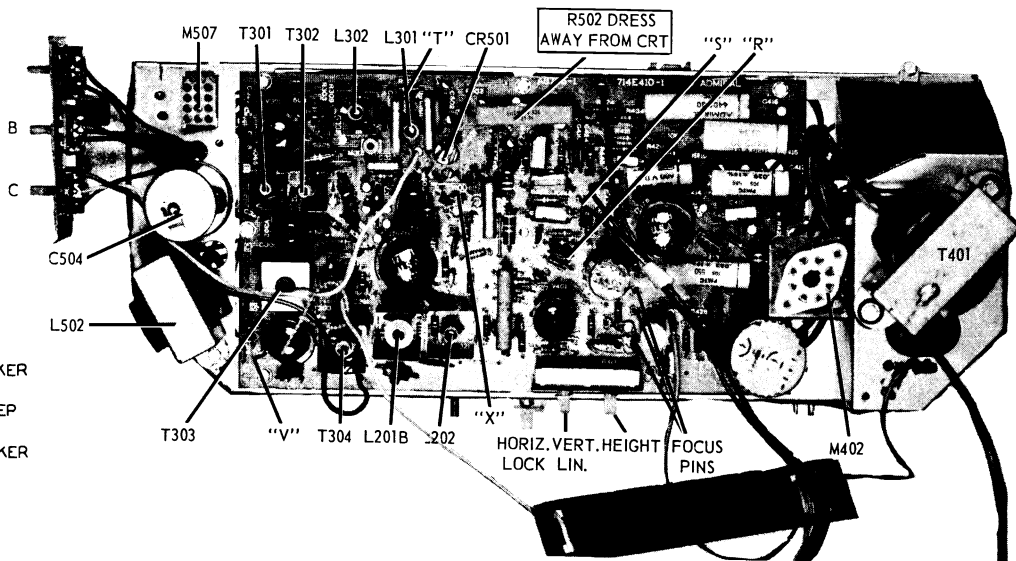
Fig. B TOP VIEW OF CHASSIS SHOWING SERVICE ADJUSTMENTS
